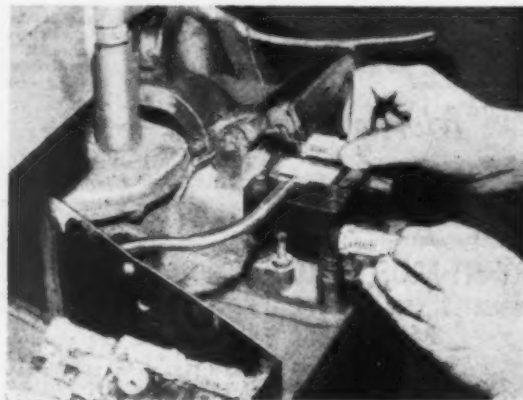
Flash is removed from bottom of side recess in lock cylinder by a 5-tooth reciprocating file.
